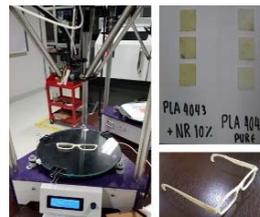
PLA/NR blends products fabricated by a Fused-Deposition Modeling 3D printer.
